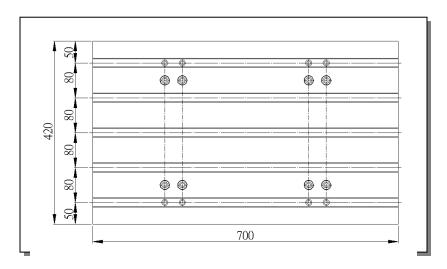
POSITION OF WORKPIECE ATTACHMENT AND DETACHMENT
